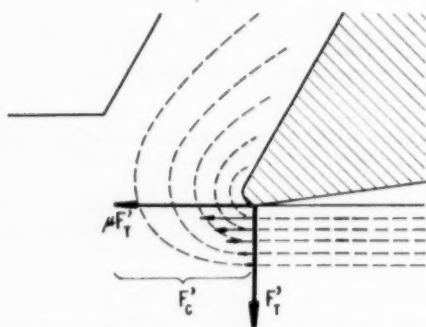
SYMBOLIC REPRESENTATION OF FORCES AND STRESS FLOW, WHICH PRODUCE DEFORMED LAYER AND RESIDUAL STRESSES IN AND BELOW MACHINED SURFACE
